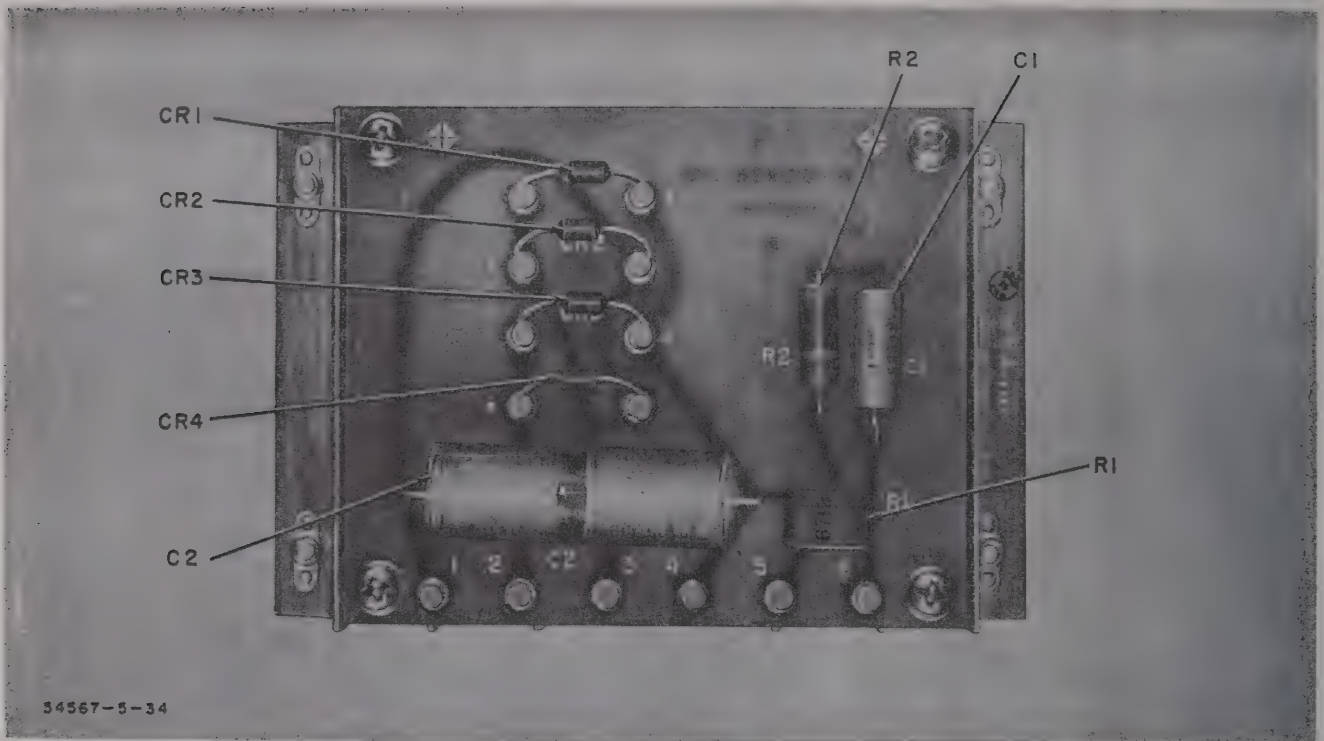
18/28-Volt Power Supply, Printed Wiring Board A2, ECI 61-00928-001, Part Location
